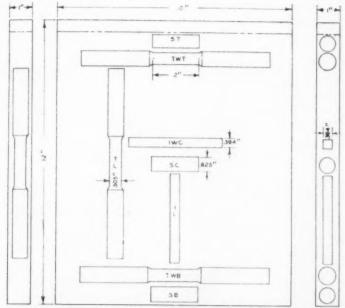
SKETCH SHOWING LOCATION OF TEST SPECIMENS IN UNIFORMLY THICK SECTIONS.
